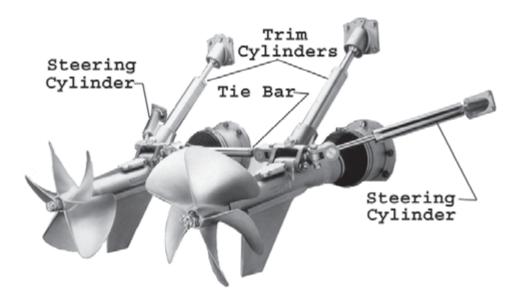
Rear View of Dual Installation Showing Cylinders and Tie Bar
